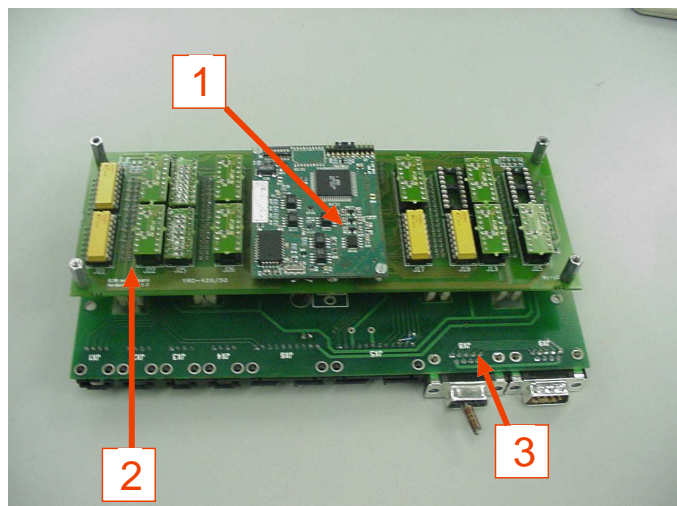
A view of the ELMB sub-assembly, which consists of the ELMB [1], Motherboard [2] and the Adapter Board [3].
